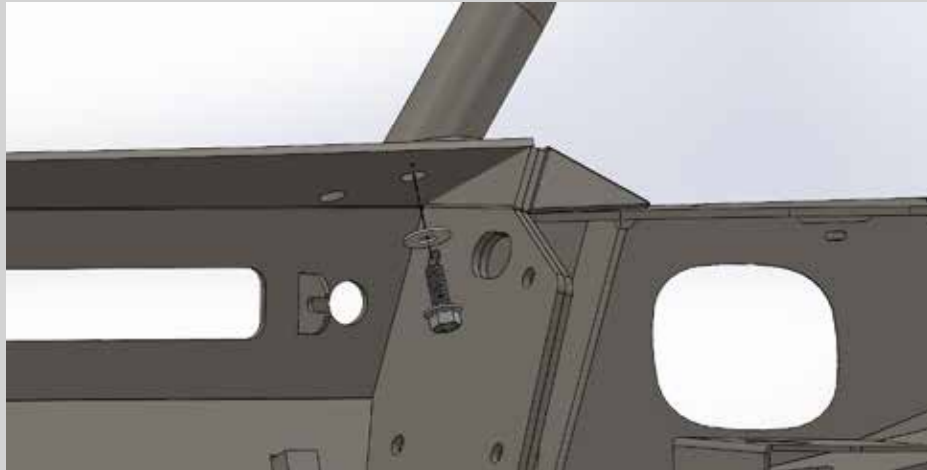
Start the $\frac{3}{8}$ " flange bolts that thread into the bull bar tube.
